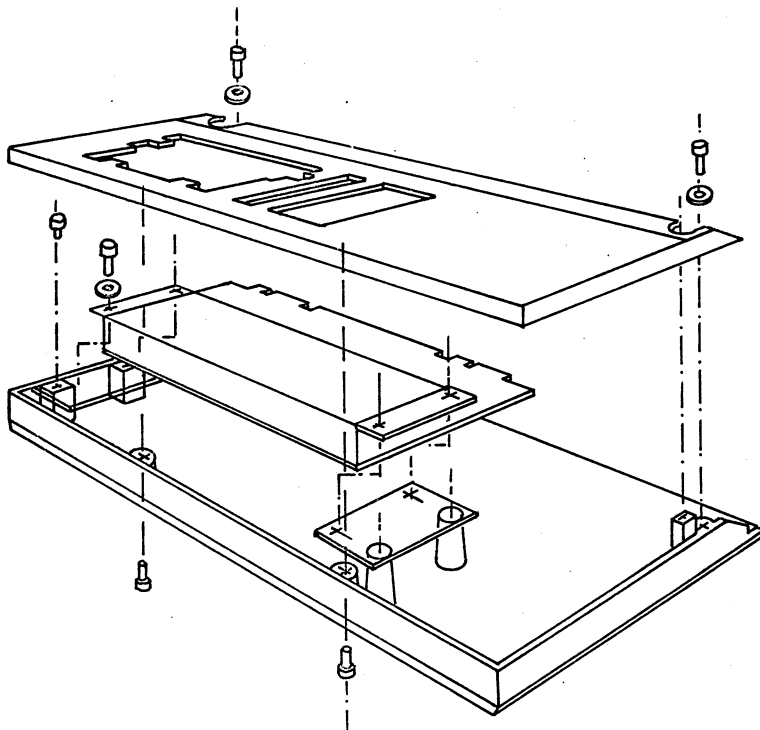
Keyboard Covers with Separate Numeric - Pad
